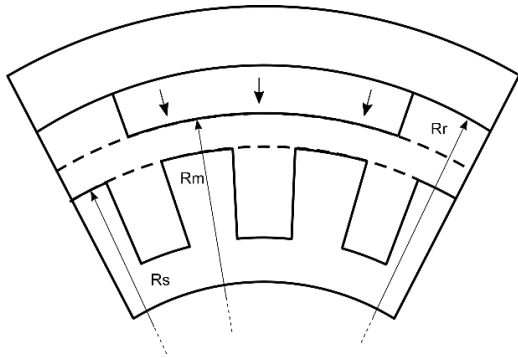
Single pole pitch cross section of outer rotor SPM motor.
